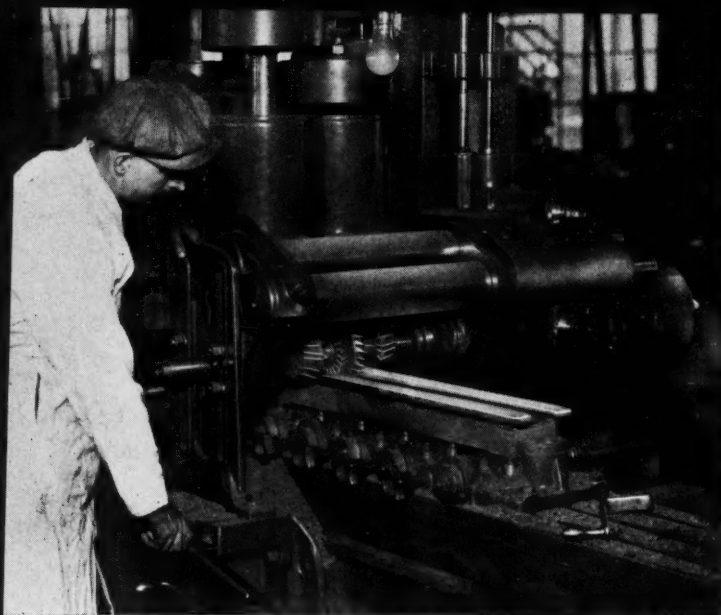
Eight faces of lathes being milled simultaneously in this Milwaukee Simplex milling machine.
